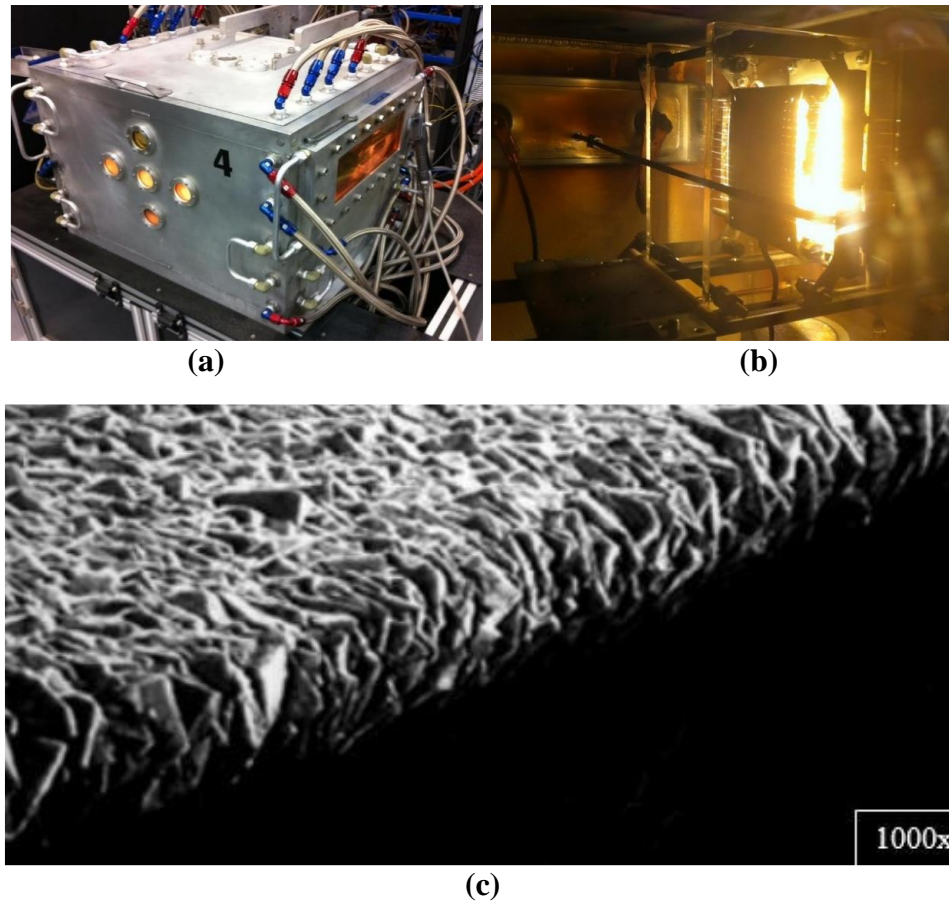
(a) Vacuum chamber used for the CVD process (b) Hot filaments in vacuum chamber (c) Close-up view of a Crystallume CVD diamond coated end mill with uniform coating [17].
